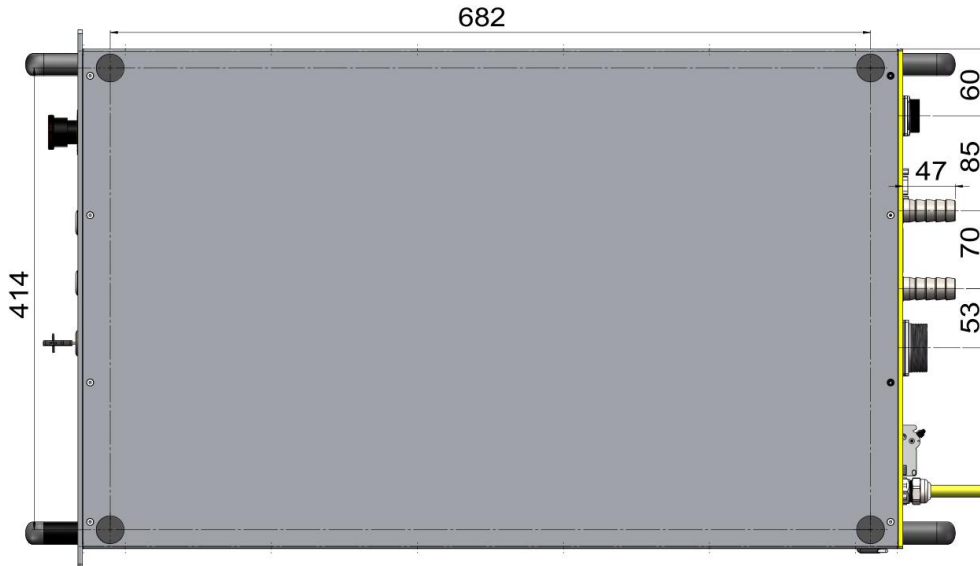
(b) Bottom view of 3000W fiber laser (unit: mm)
